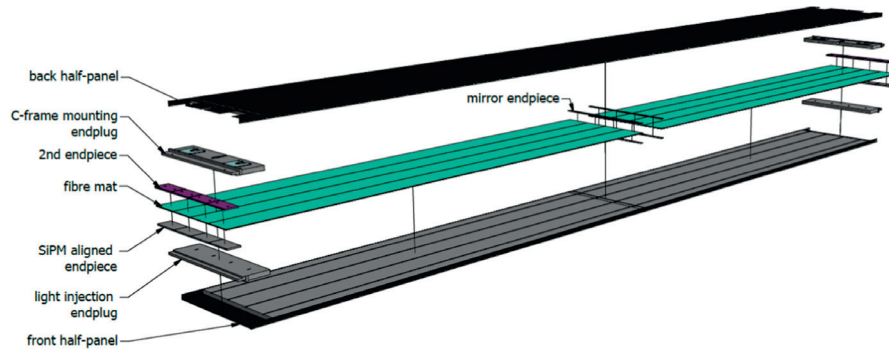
Exploded view of module assembly. Image taken from [31].
